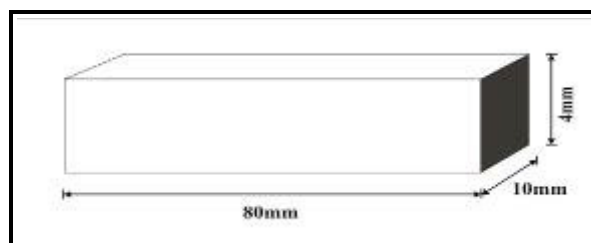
Schematic Specimen for Standard Specimen of Impact Test.
